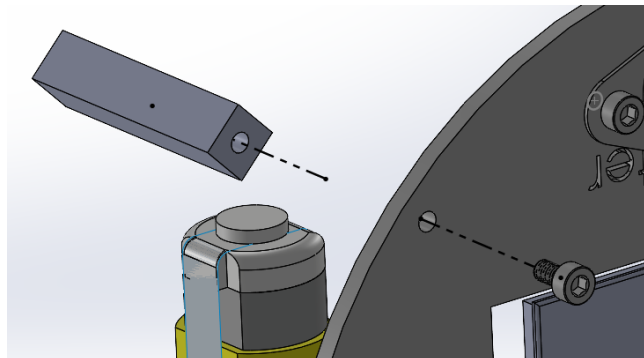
Connect one standoff to the robot bottom chassis with an 8 mm M3 screw
